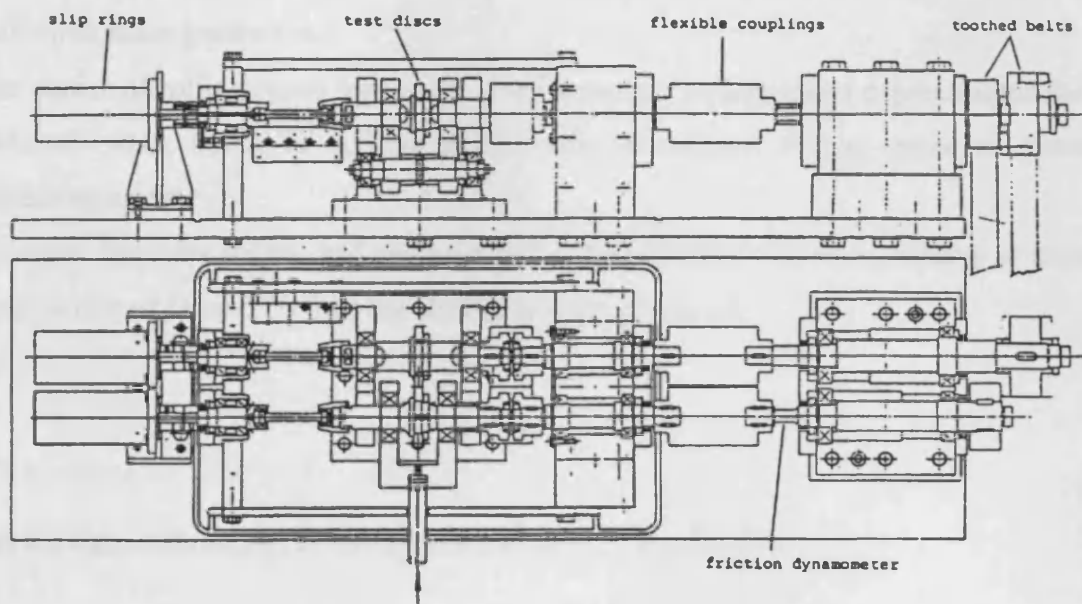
Section and plan drawing of the test head and drive arrangement of the high speed scuffing rig.
